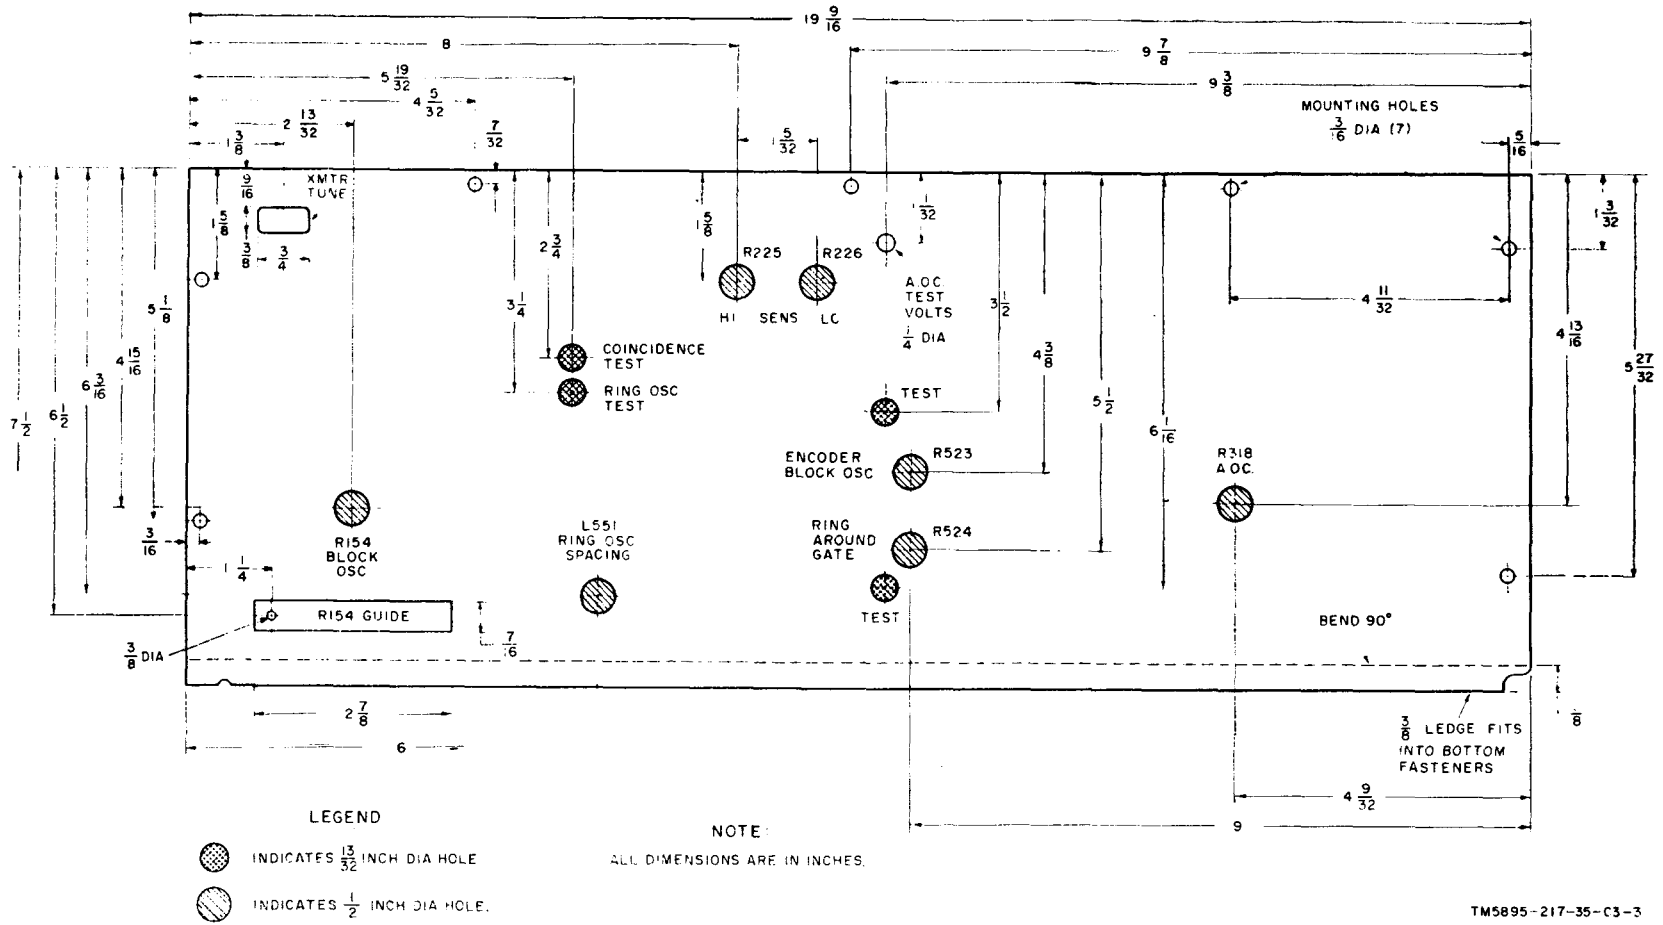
Receiver-Transmitter, Radar RT-494/APX-44, test panel dimensions.
